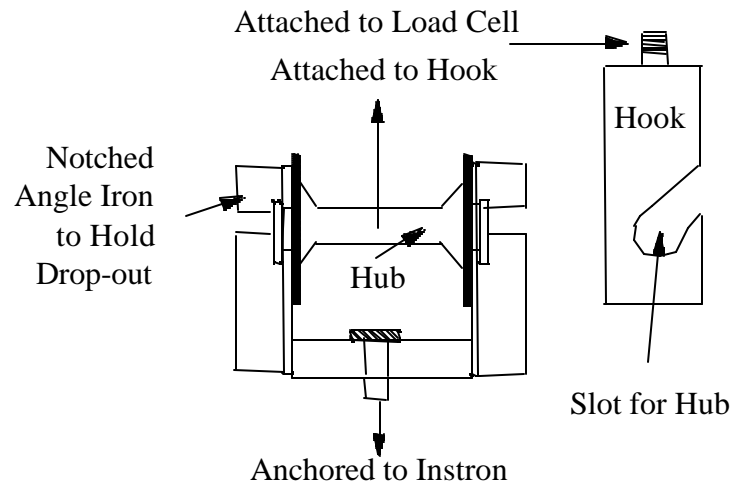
Schematic of Pull-out Fixture for Instron
